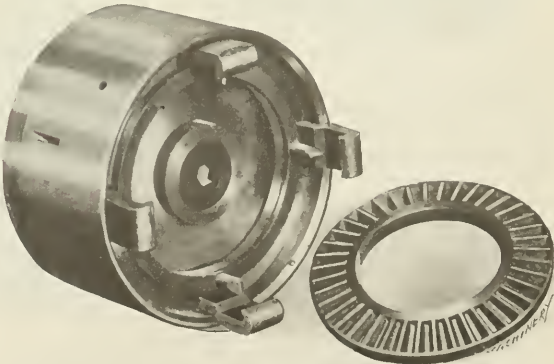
Detroit Pneumatic Chuck for holding Automobile Ring Bevel Gears
